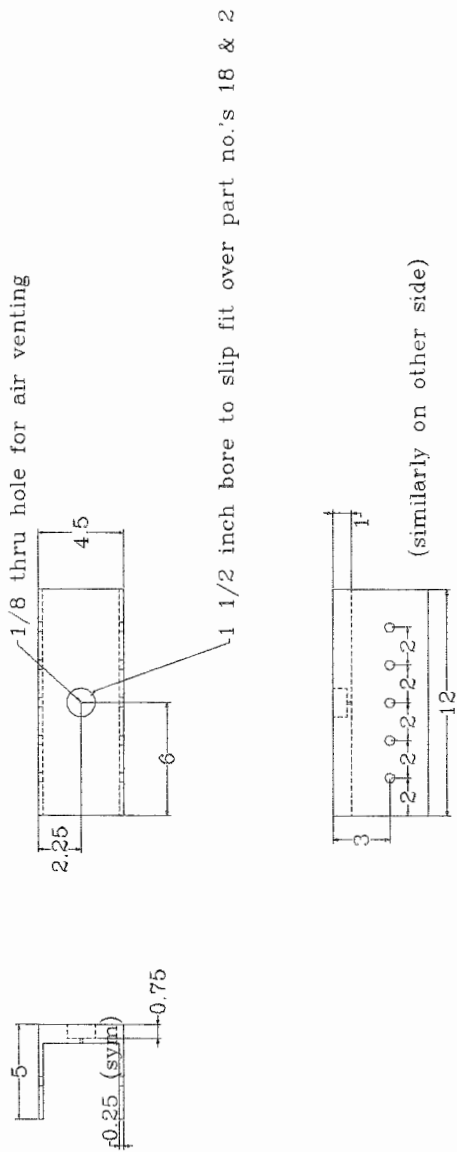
Part No. 24 LIDAR Table Mounting Bracket
